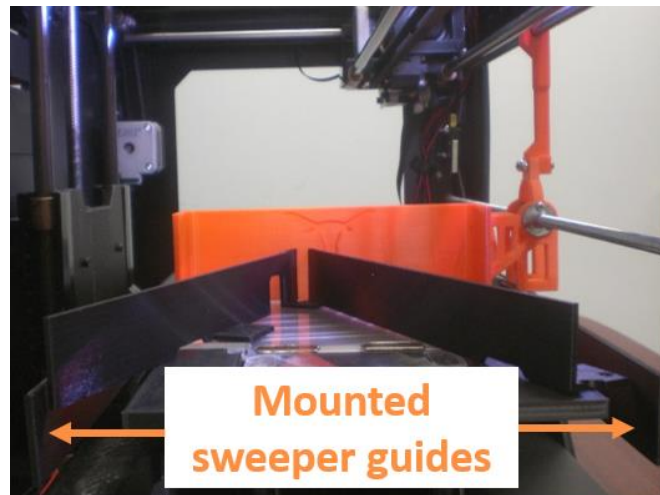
Sweeper guides being swept off the build plate. The mounted sweeper guides keep long parts from jamming as they exit the printer.
